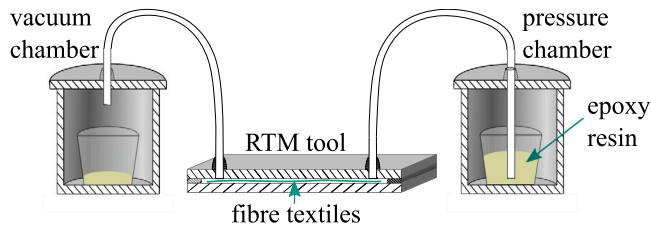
Schematic setup for resin transfer moulding for the manufacturing of the specimens.
